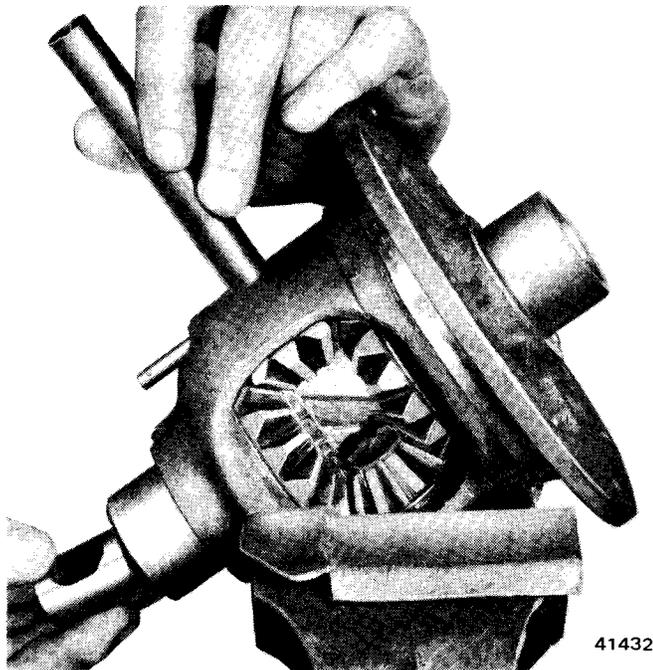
Removing Pinion Mate Shaft and Thrust Block
